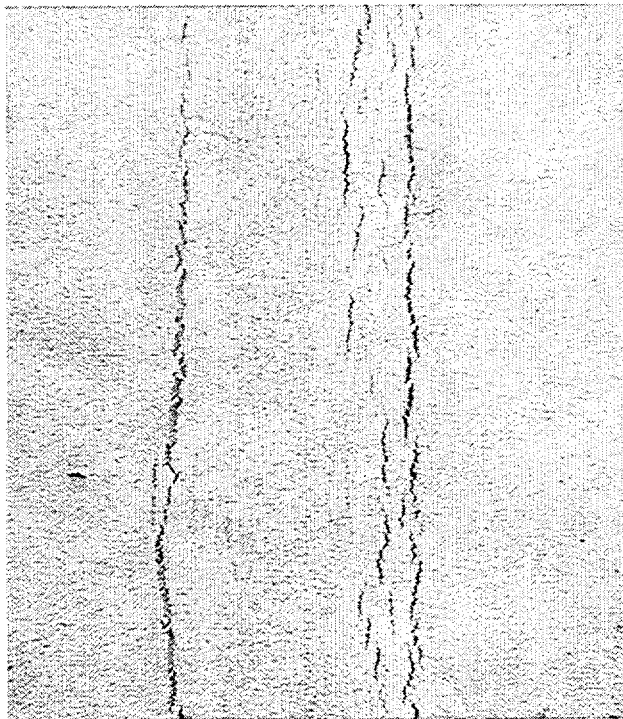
Close-up of exterior view of local deformation as paint cracks at the vertical weld seam at location 340° in lower conical shell section.
